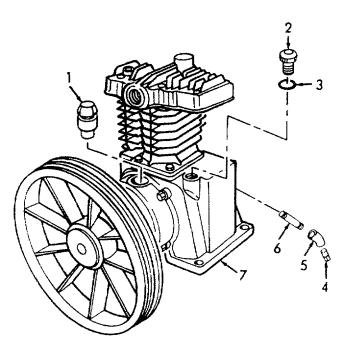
Oil Filler Cap, Plug and Drain, Removal.
